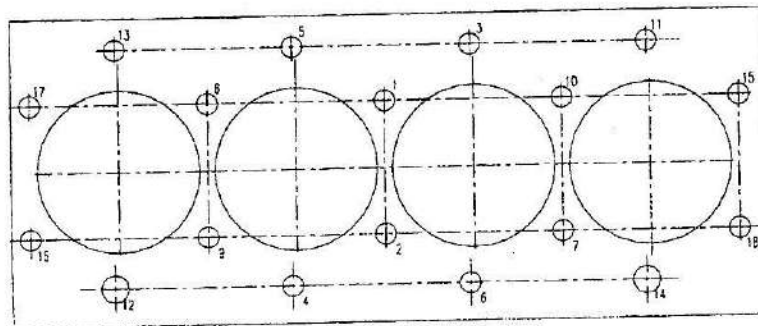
Sequence of tightening the bolts of the cylinder head
